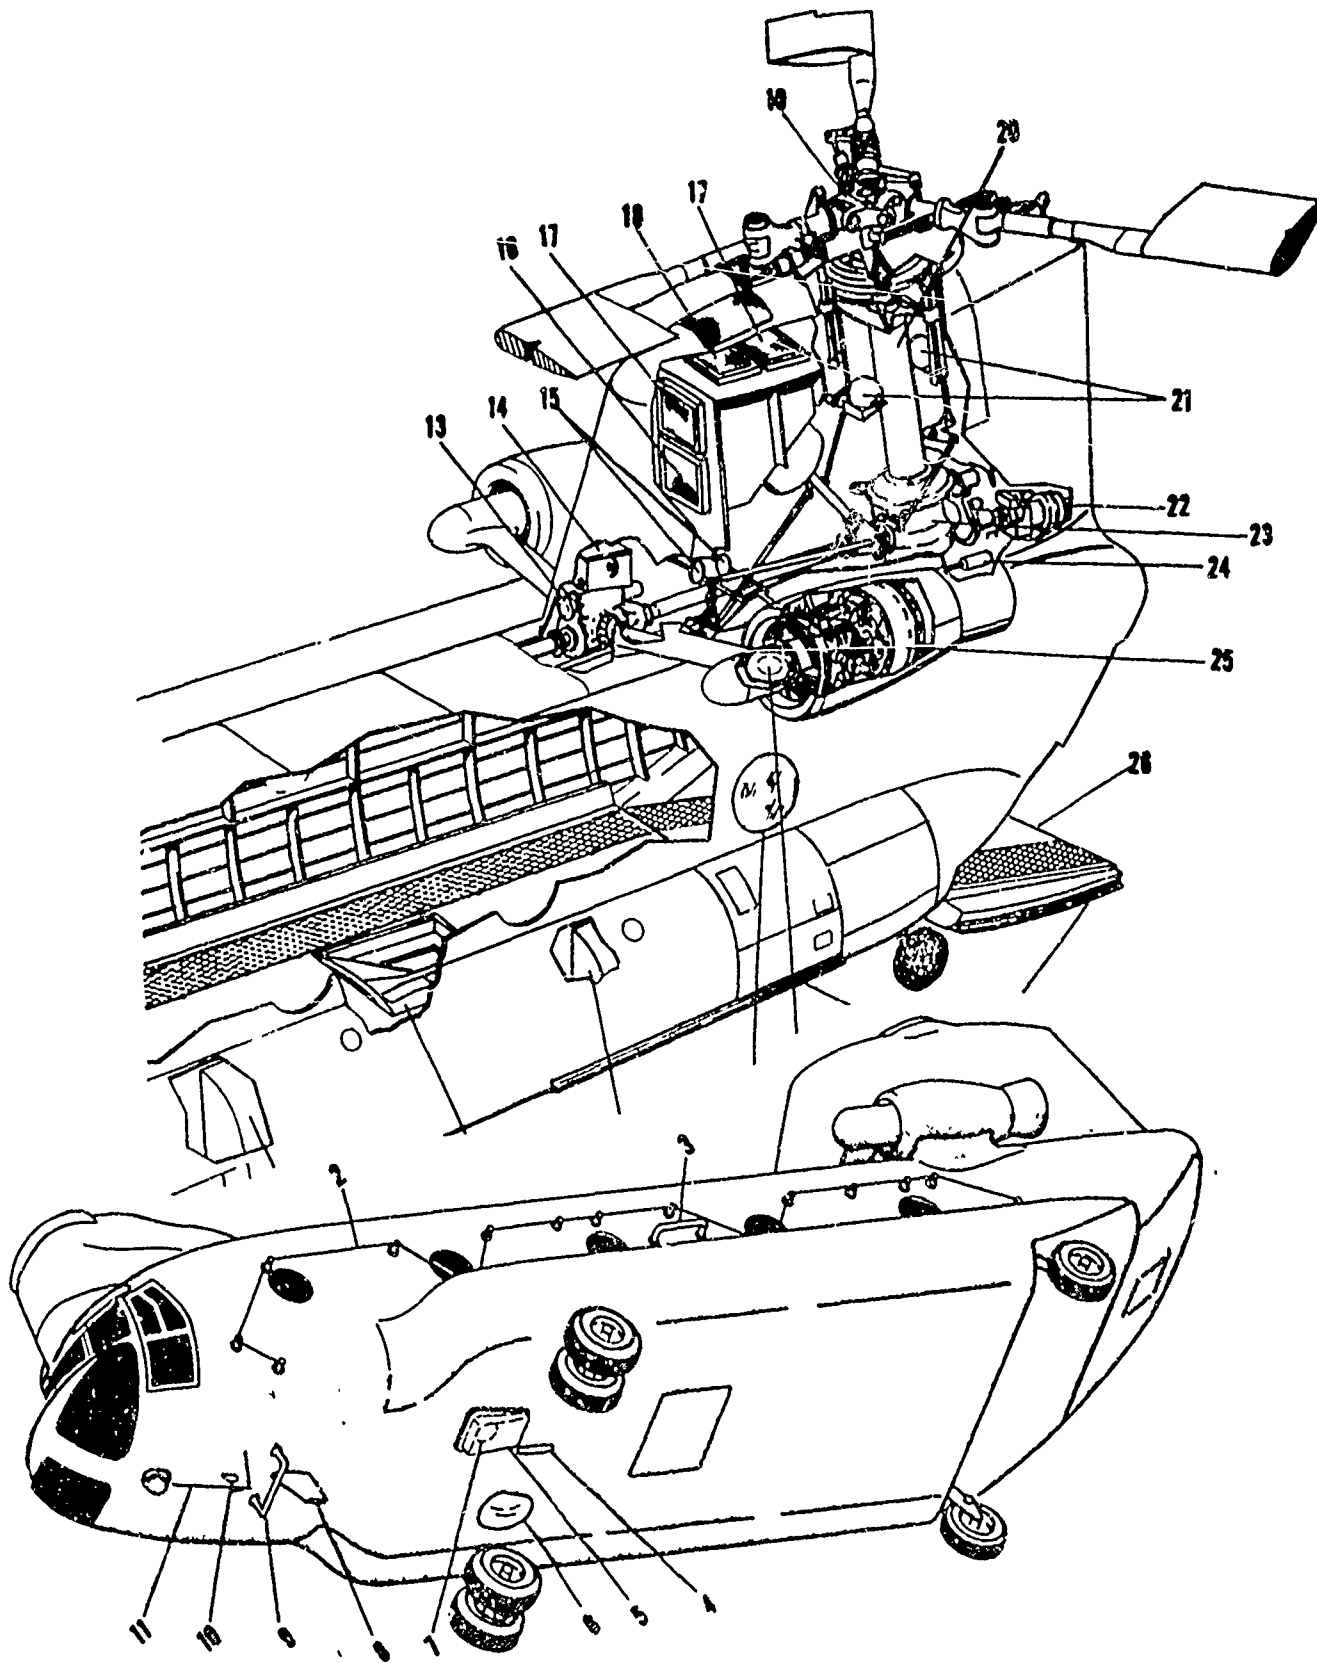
Rear and Lower Views of Engine Section -- CH-47
